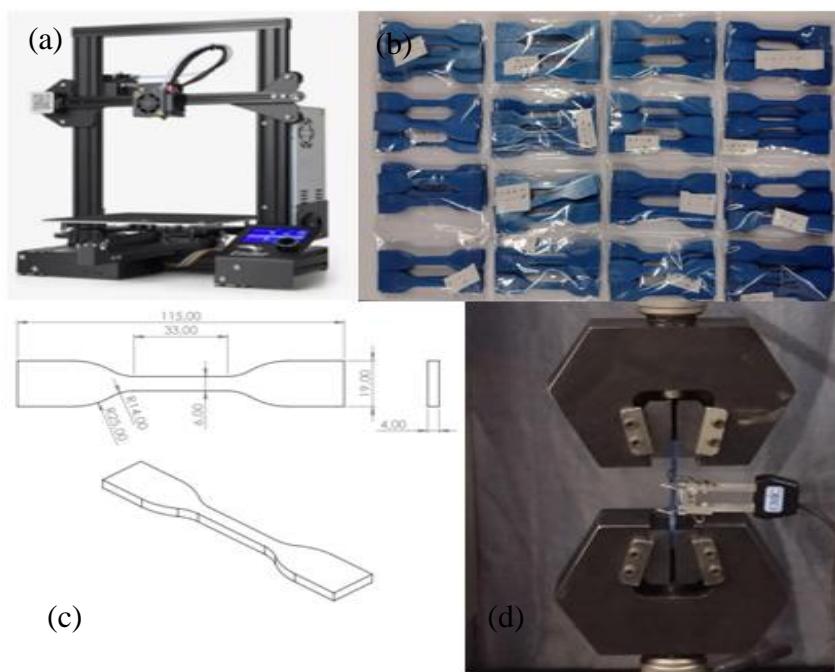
(a) Creality Ender 3 printer, (b) printed specimens, (c) specimen dimensions and (d) tensile test.
